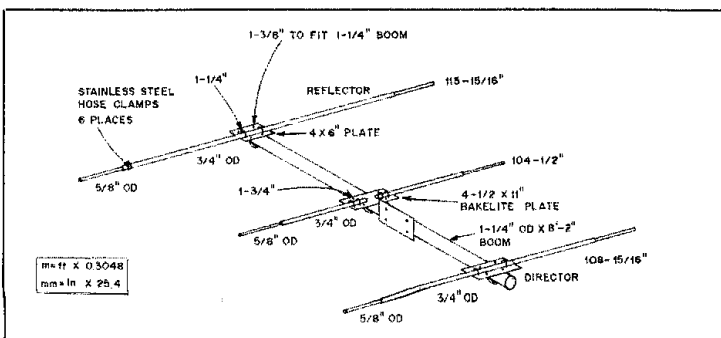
Dimensional drawing of the 3-element, 50-MHz Yagi described in the text.
